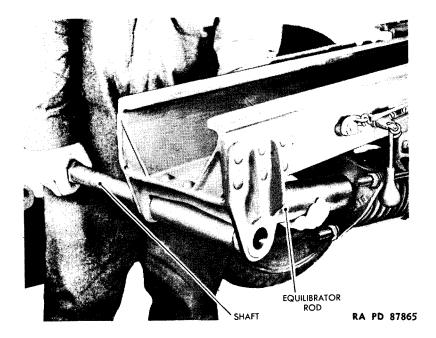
Removing Shaft From Cradle Bracket and Equilibrator Assembly
